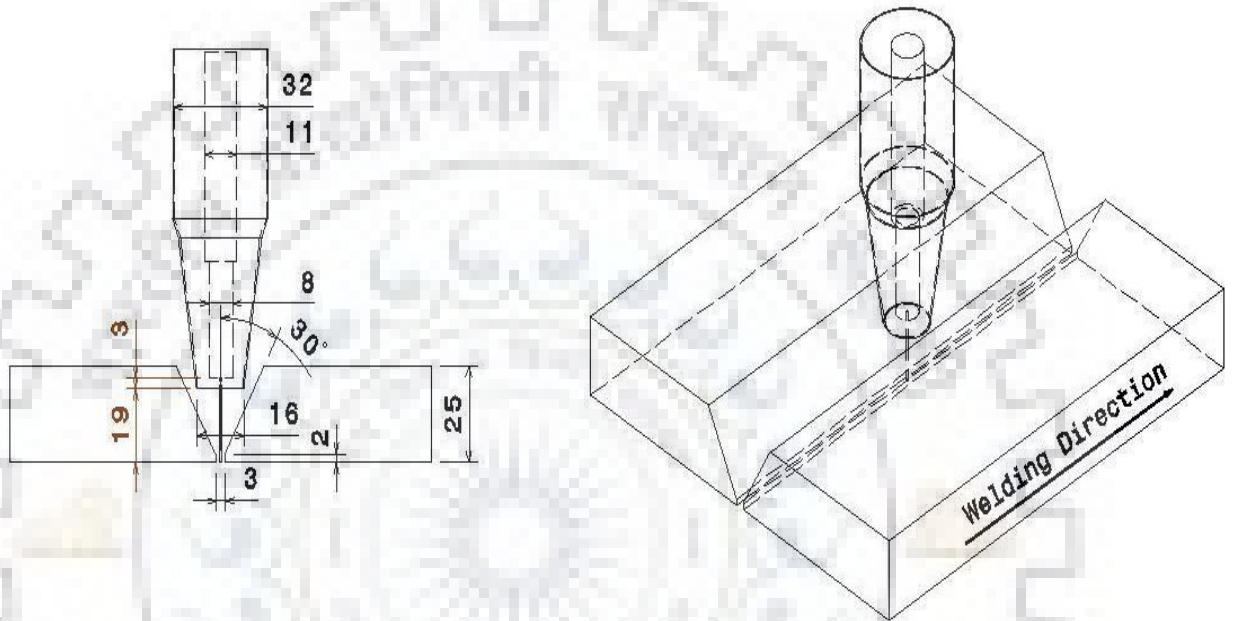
Schematic diagram of conventional GMAW welding torch with 28mm groove opening.
